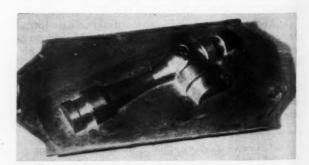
Single impression matchplate. Pressure cast in a plaster mold.
